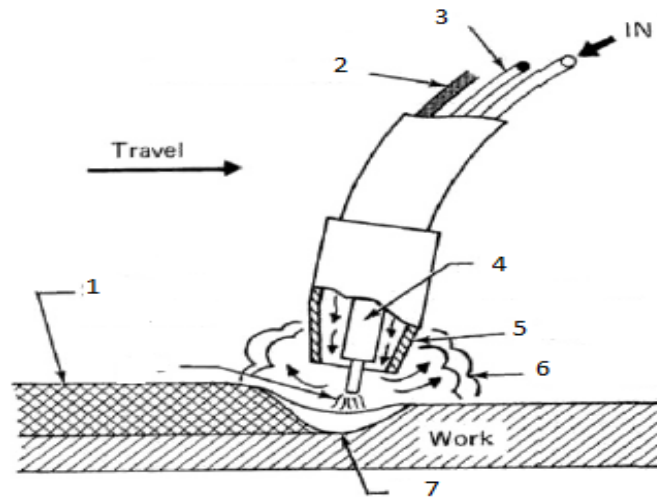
Gas Metallic Arc Welding (GMAW)
